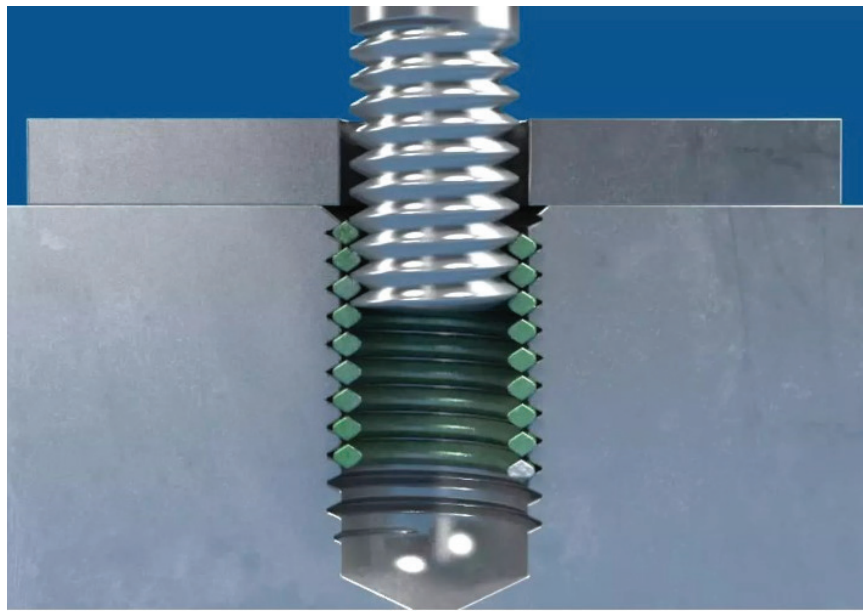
Steel spring insert connecting aluminium elements with a steel bolt
